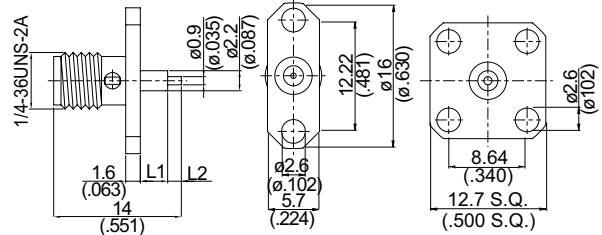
2-hole flange Fig. 4-2: square flange
